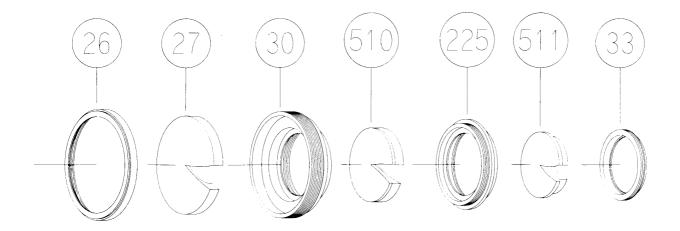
Second Lens Group Assembly (Ref. 502)
